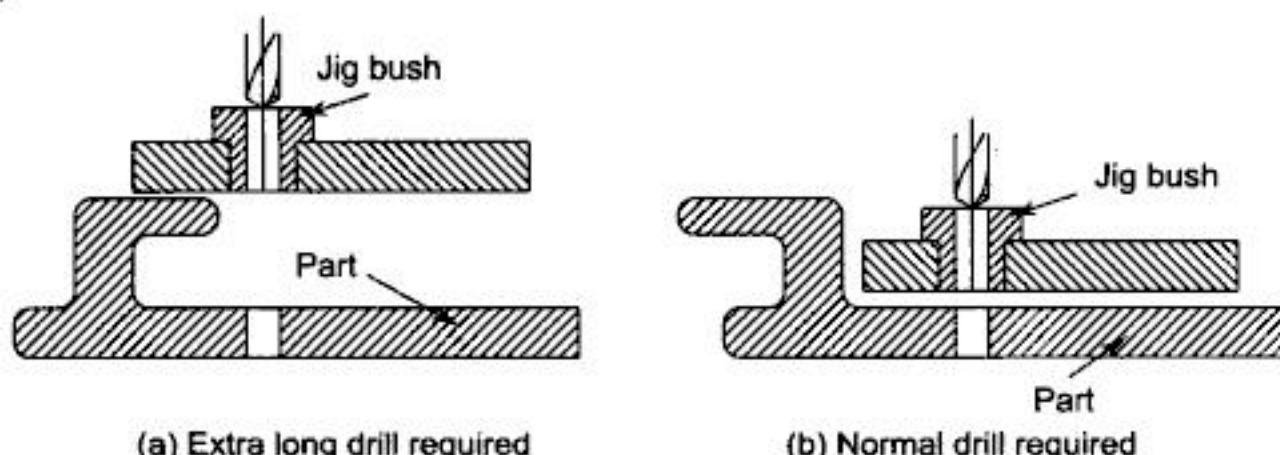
Provision for jig bush to stay as close to the hole entry surface should be ensured
